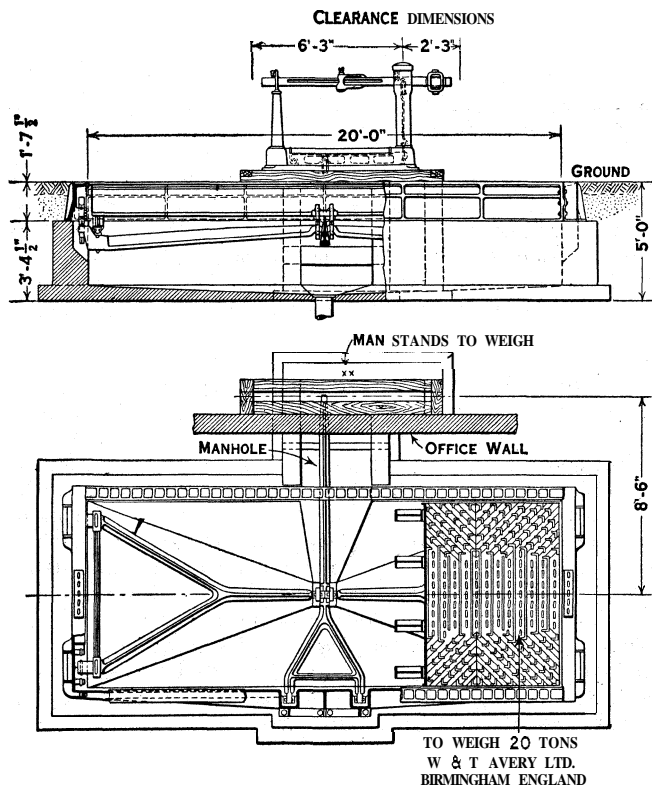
PLAN AND ELEVATION OF A BRITISH WEIGHBRIDGE CONNECTED TO A "NO-LOOSE-WEIGHT" STEELYARD
